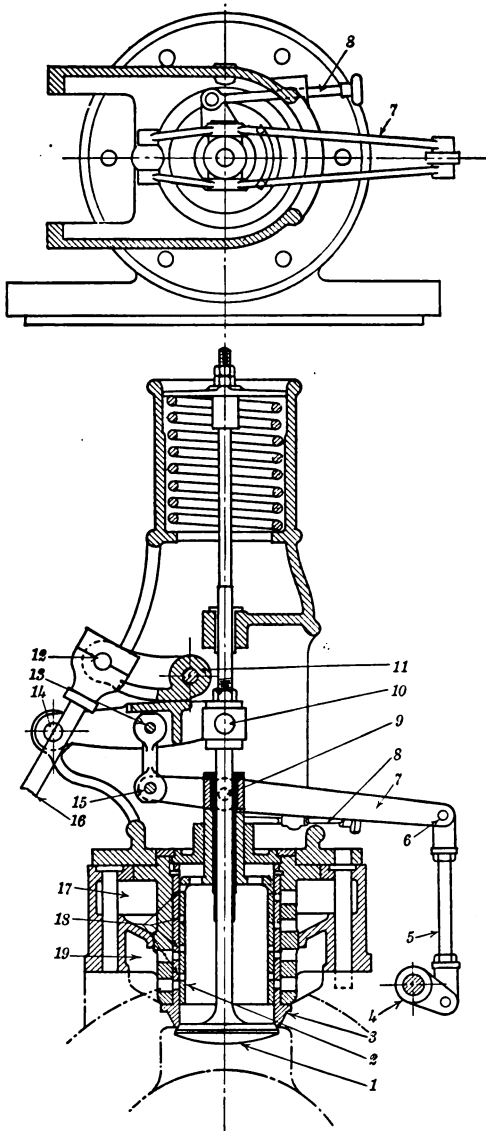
INTAKE VALVE, REGULATING SLEEVE AND GEAR, WESTINGHOUSE GAS ENGINE
